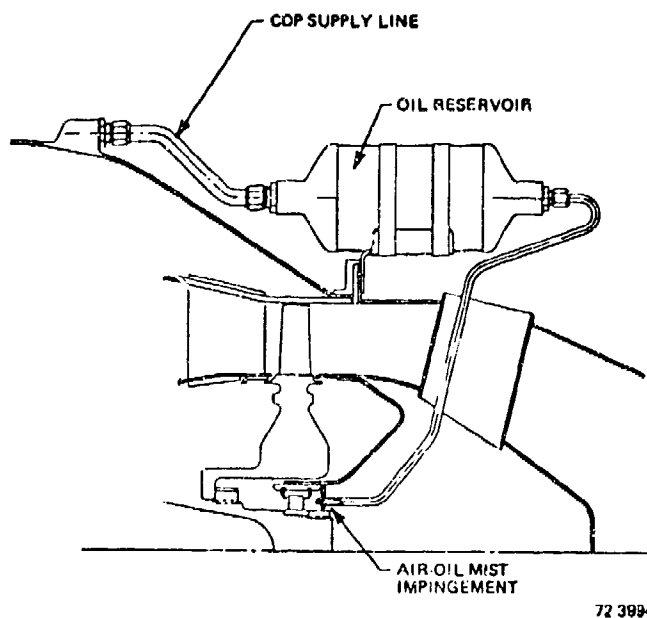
Typical Teledyne CAE Expendable Oil Mist Rear Bearing Lube System.
